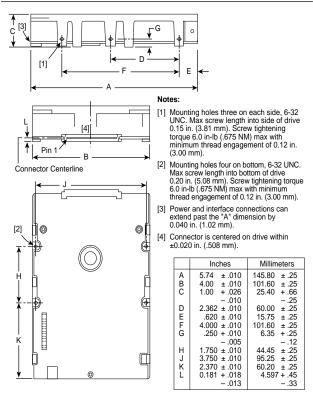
Hawk 1LP family WC model mounting configuration dimension (80 pin I/O connector)
